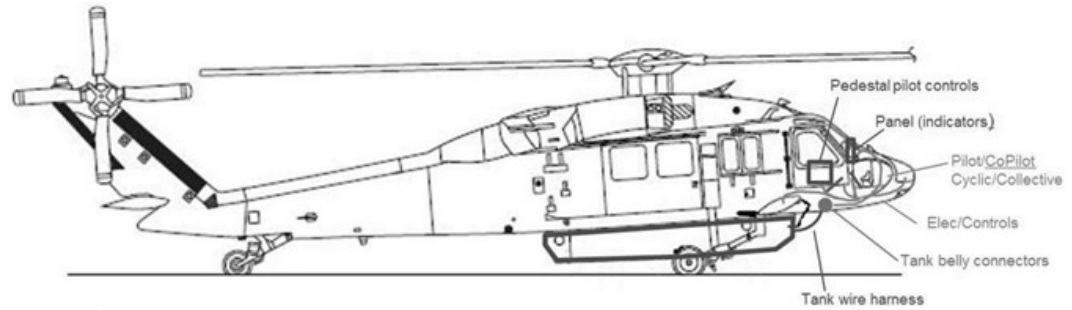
Tank A Kit Electrical/Controls Wiring
